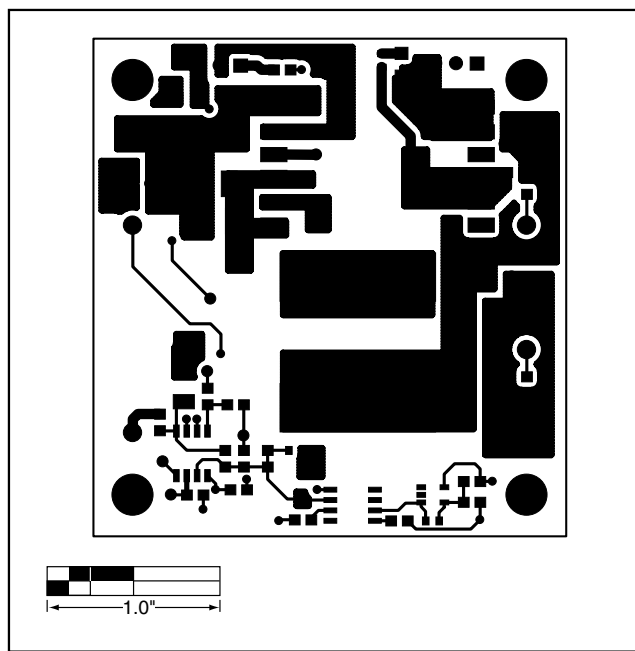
MAX5015 EV Kit PCB Layout—Component Side
